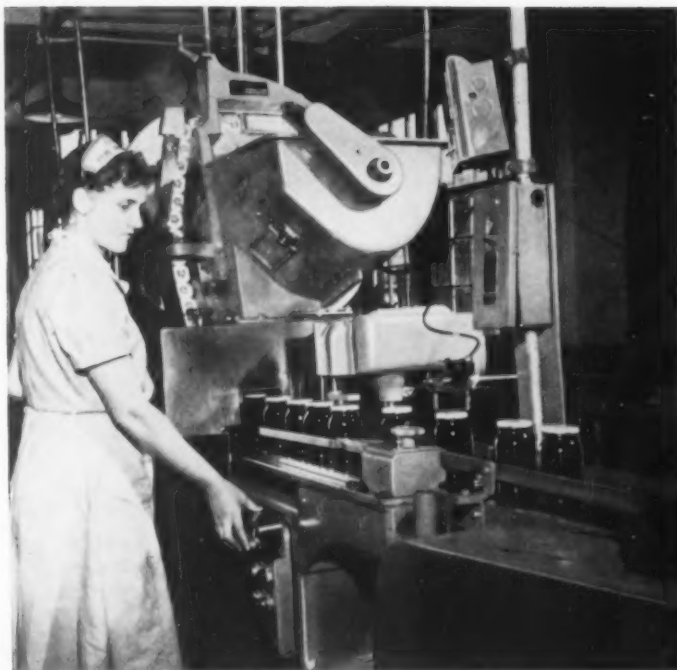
PHOTO COURTESY CROWN CORK & SEAL CO., INC.
